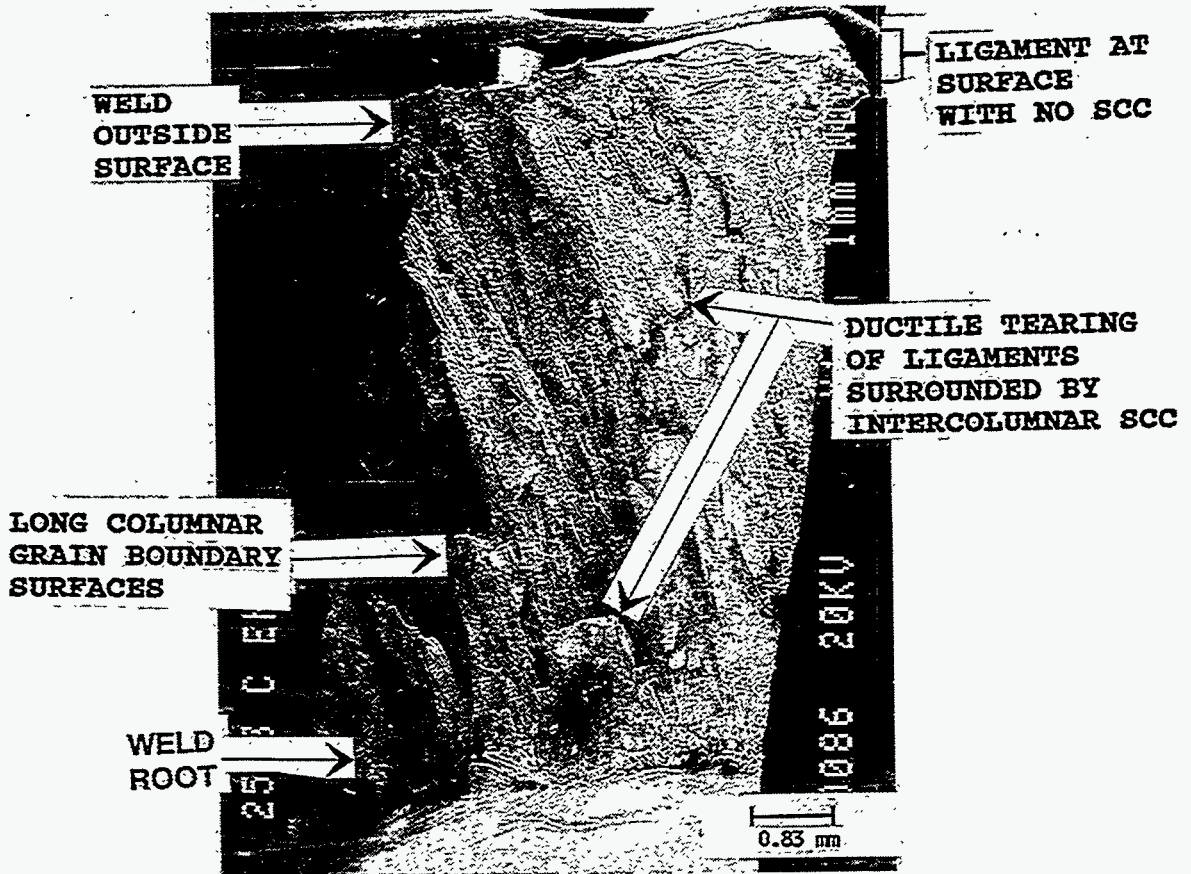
FRACTOGRAPH OF WELDED SPECIMEN 2
